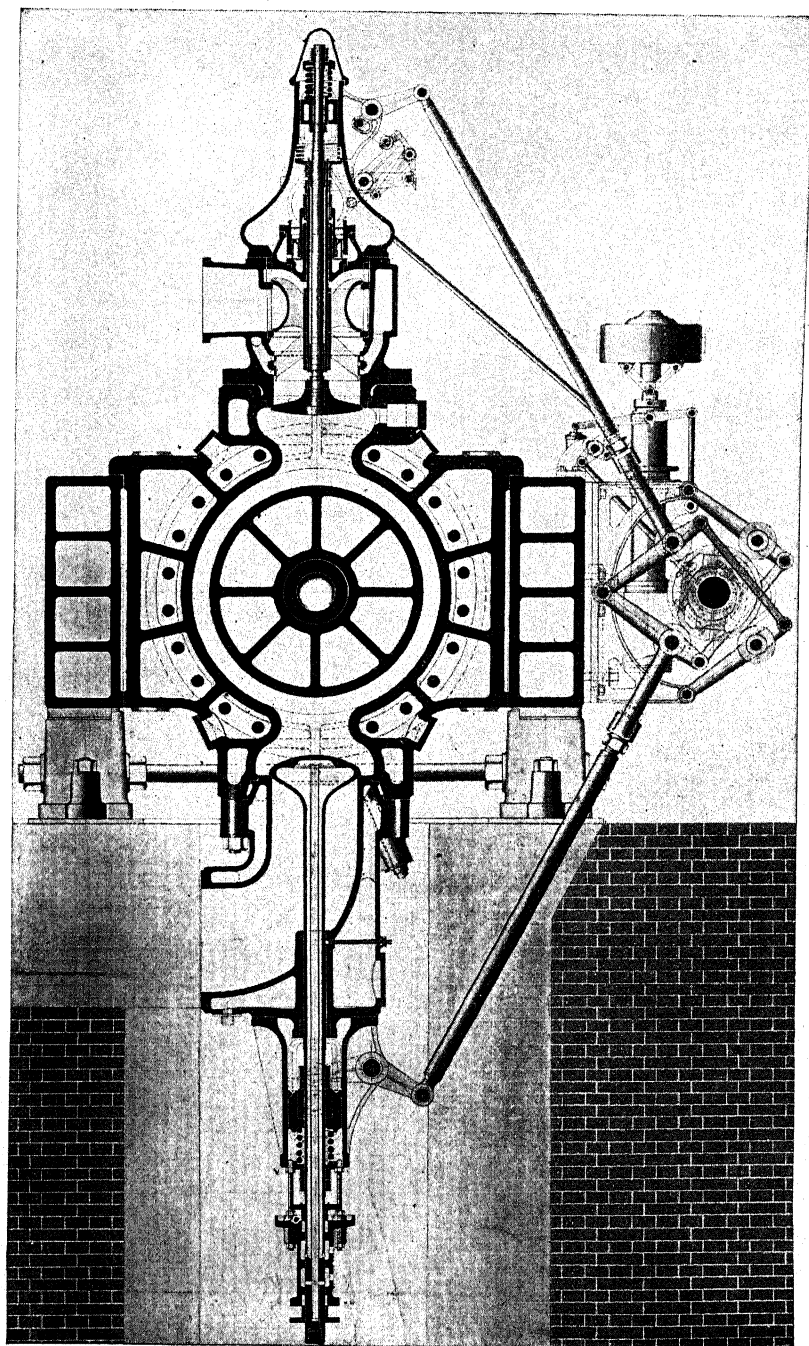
SPECIAL VALVE ARRANGEMENT OF THE COCKERILL ENGINE.
